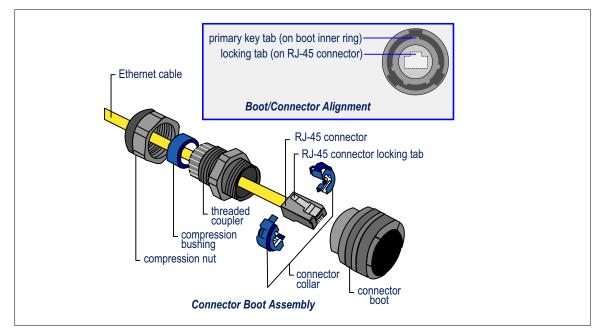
Installing the RJ-45 Connector Boot Assembly
